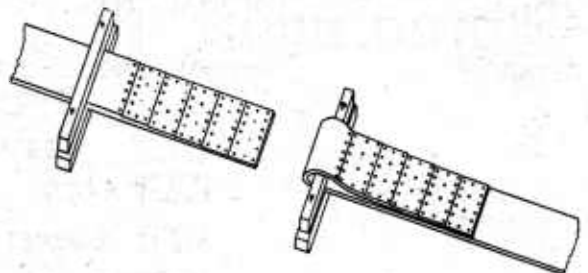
Step-trimmed ends of composition belt ready for splicing. Dots show where rivets will be located.
